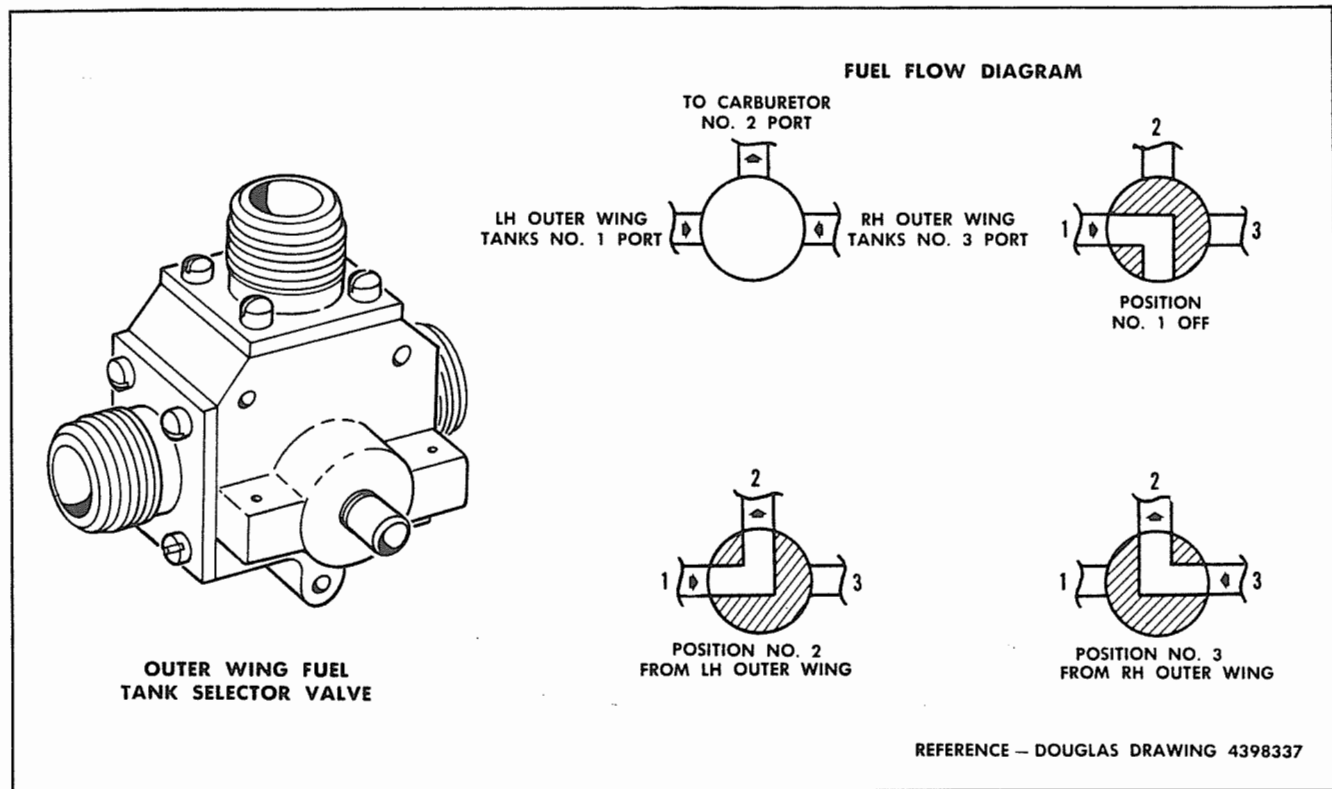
Outer Wing Fuel Tank Selector Valve
